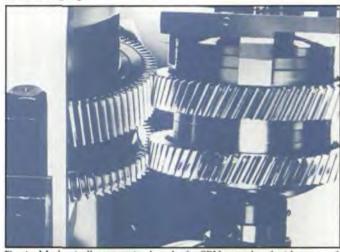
Mechanically constrained mesh of a CBN-coated tool with a crossed helical gearing.
